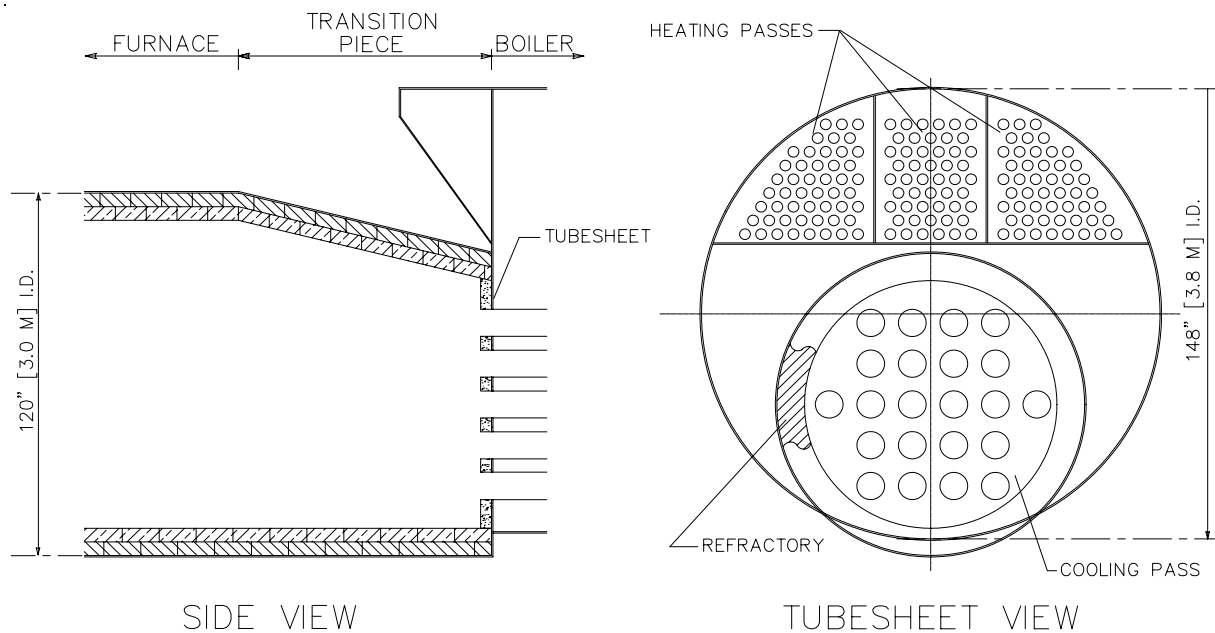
SRU-4/5 Alternate Design for Package-Style WHB With a Conical Transition Piece
